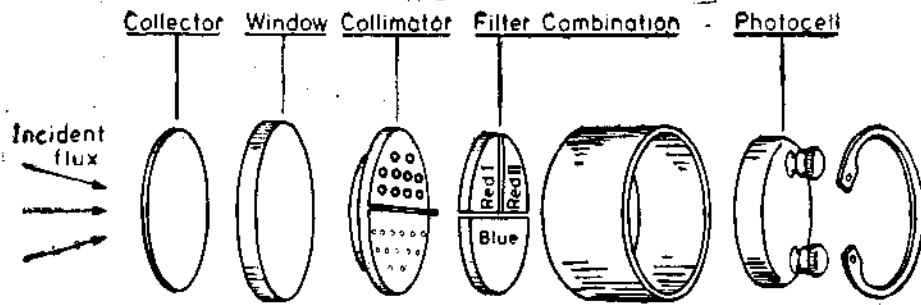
Exploded view showing the component parts of the quanta meter assembly (excluding pressure housing).
